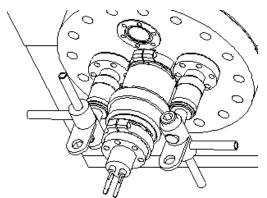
Thermocouple, Adjuster, and Water Cooled Power Terminal
